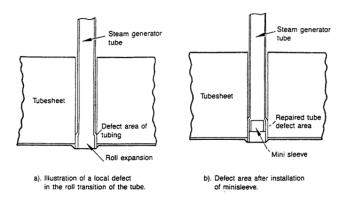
The ministeeve design (Babcock & Wilcox) using explosive welding [208]. Copyright Electric Power Research Institute; reprinted with permission.
